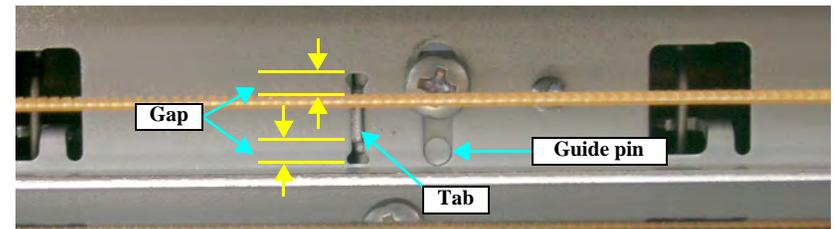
Checking the Position of Tab on the Guide Roller LD
